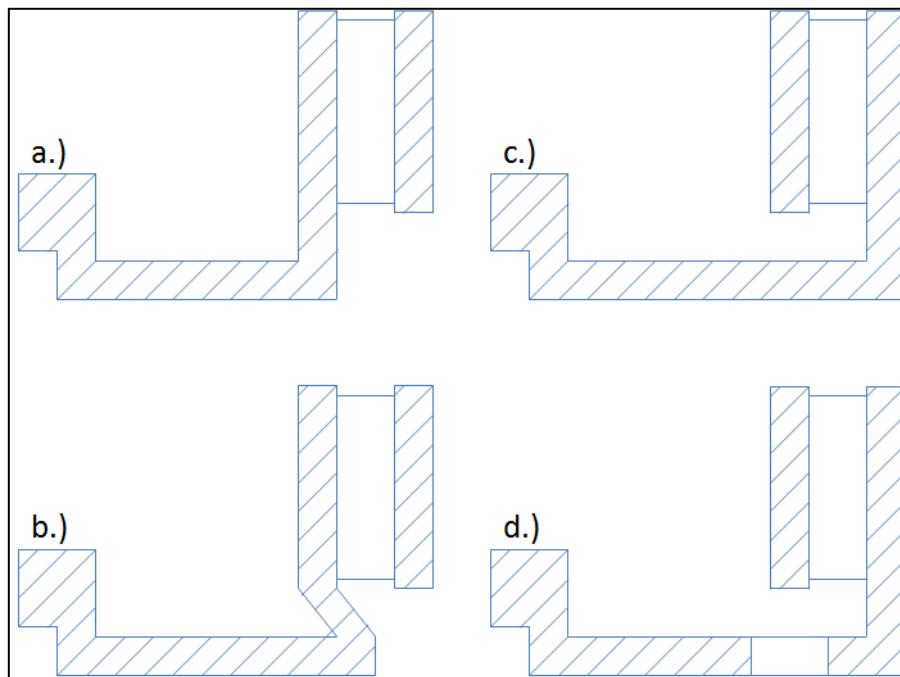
Common types of disc brake design a) standard outer hat design, b) outer with neck, c) inner hat and d) inner hat with hole.
